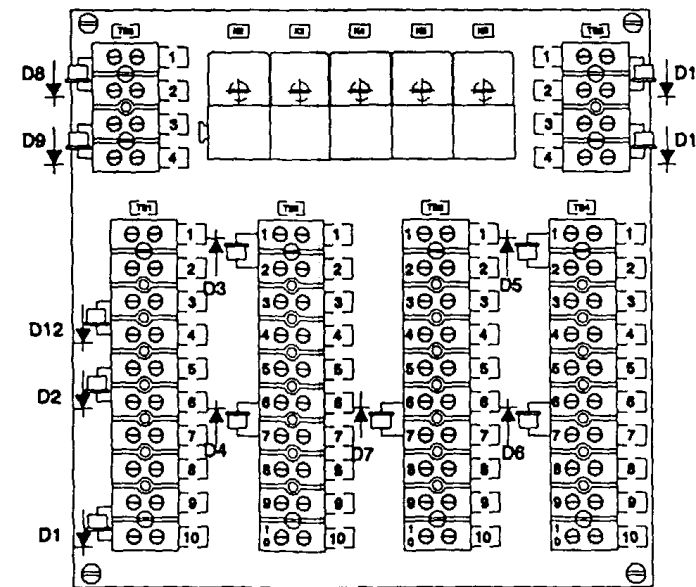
Wiring List, Bilge Pump Control Assembly "A5", and Rear View. (Sheet 1 of 2)
